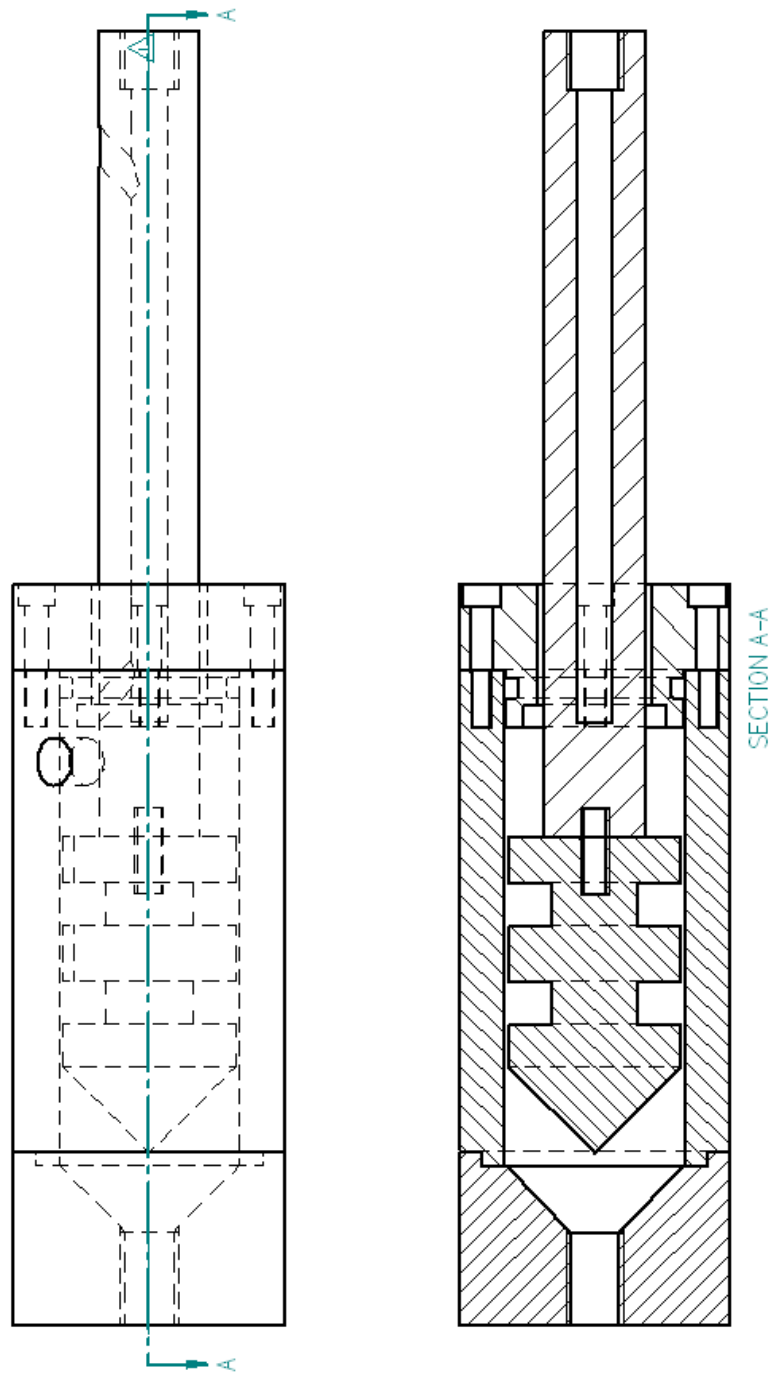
Magnetorheological fluid valve design #1, Main assembly. An identical half is coupled to complete the double sided valve.
